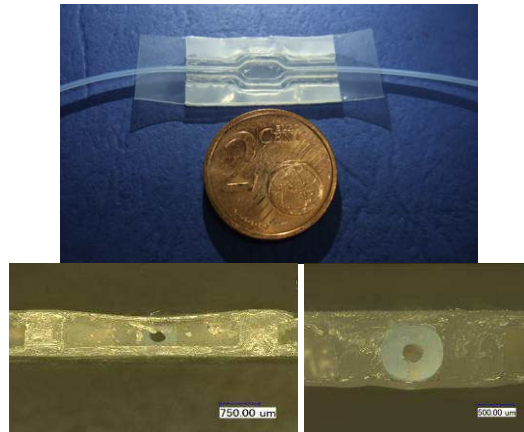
Photograph of tubing welded directly into micro channels (top) and cuts through the channel and the welded in tube (bottom left / bottom right).
